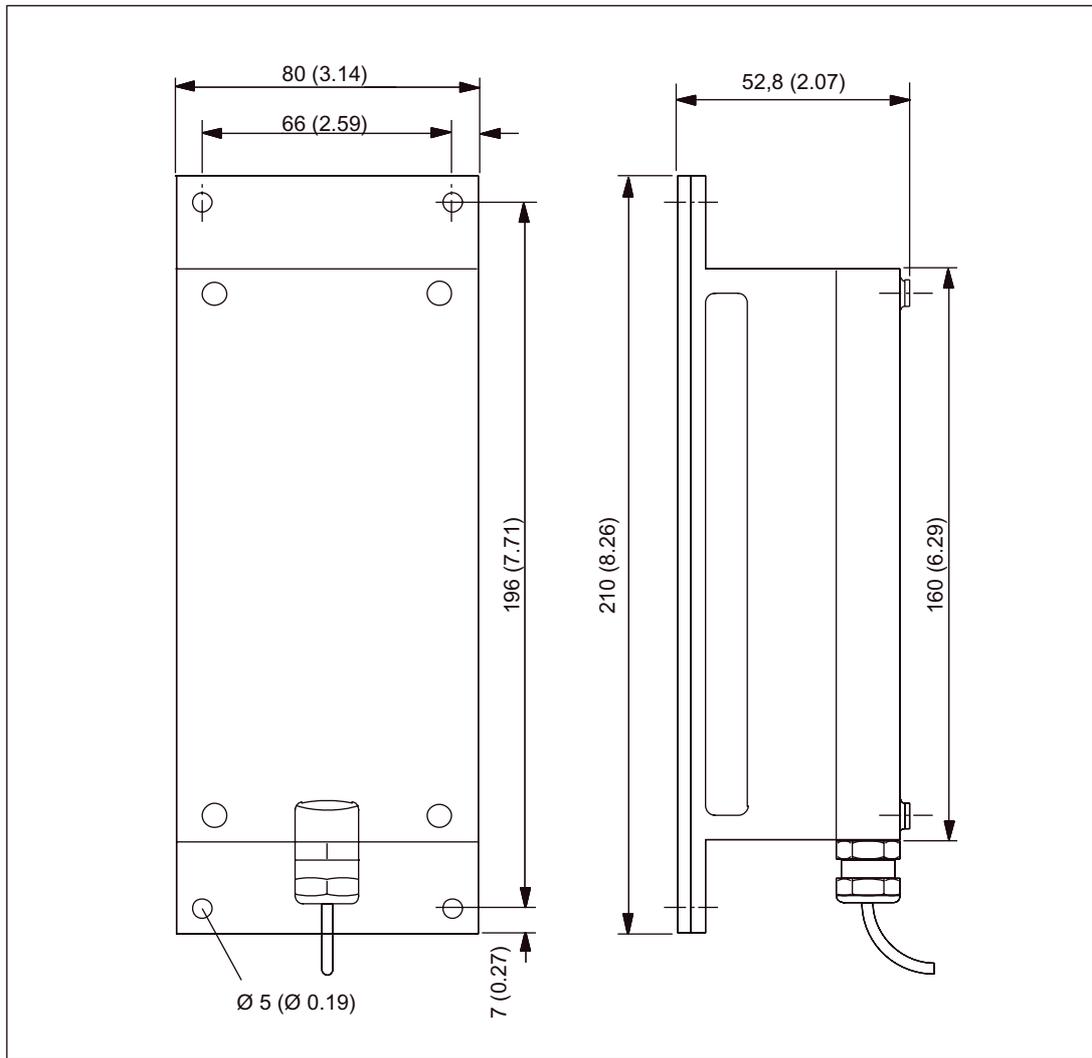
Dimension drawing of braking resistor 0.3 kW/25 kW, all dimensions in mm and (inches)
